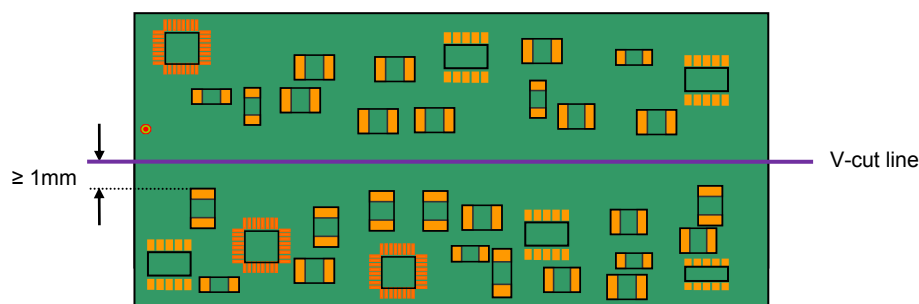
V-cut clearance for PCBs designed for automated depaneling.
